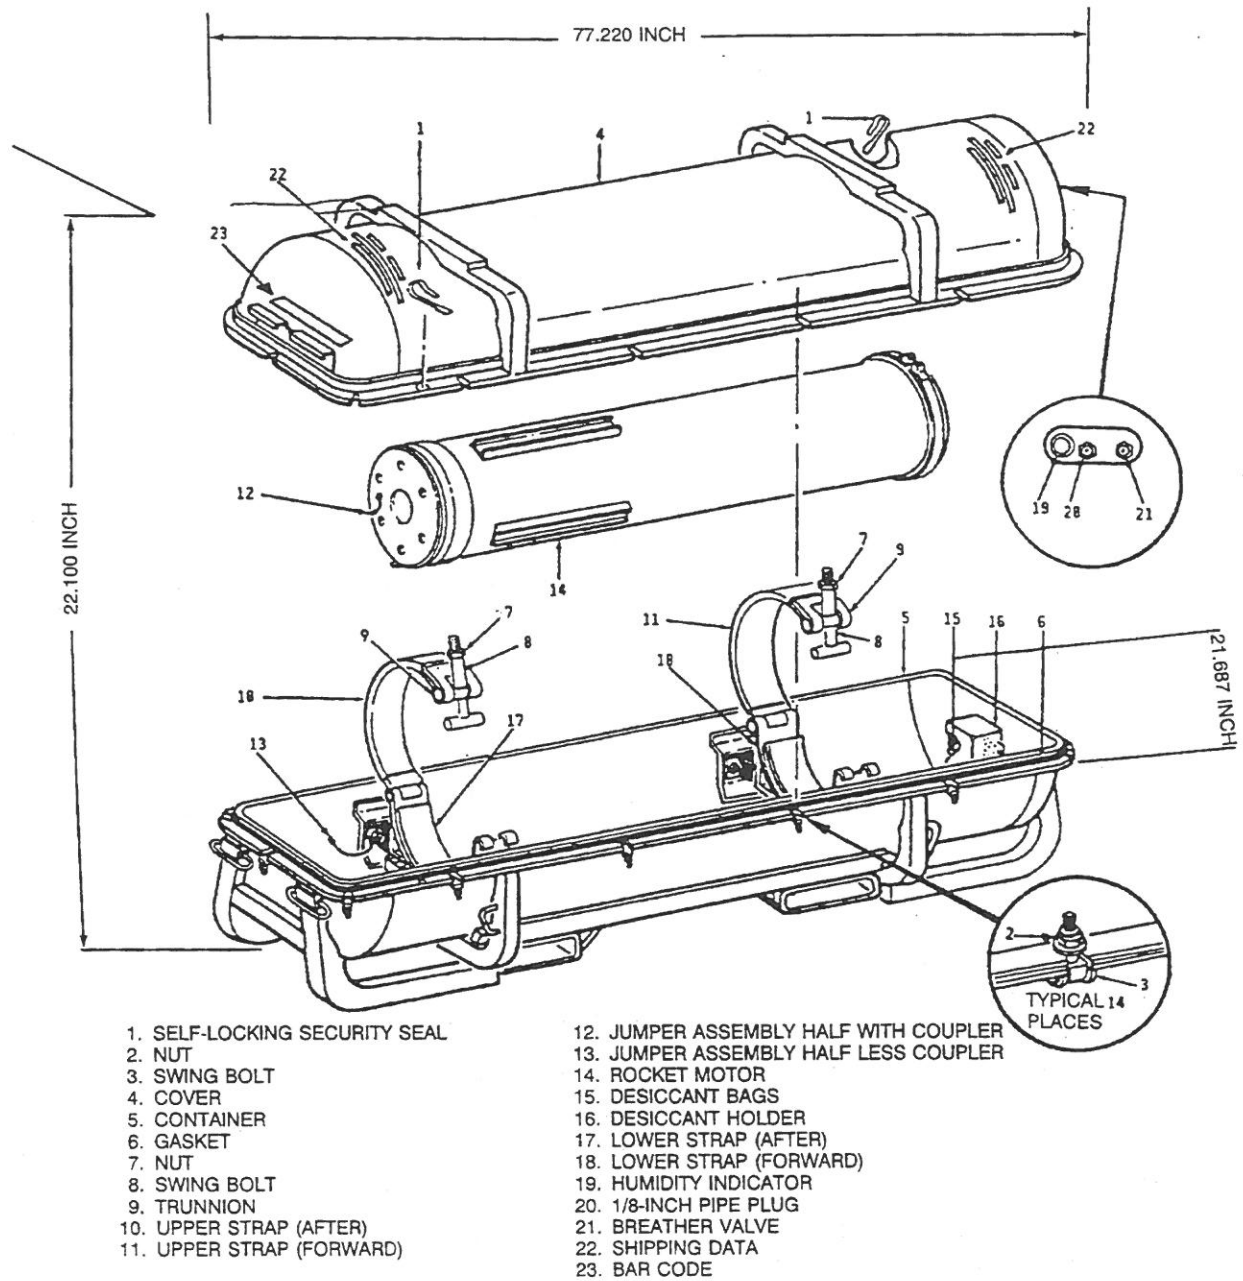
Packaging Condition of Rocket Motor Mark 37 in Container Mark 178, Exploded View
